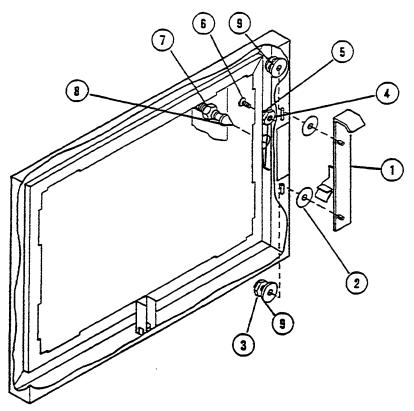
DOOR HANDLE AND LATCH ASSEMBLIES
